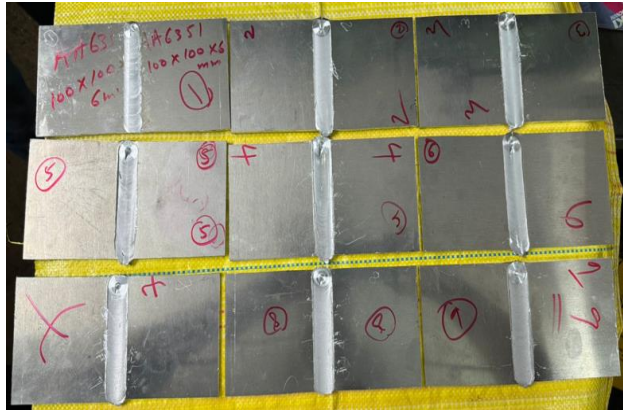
Photograph of fabricated FSW joints according to Taguchi design matrix
